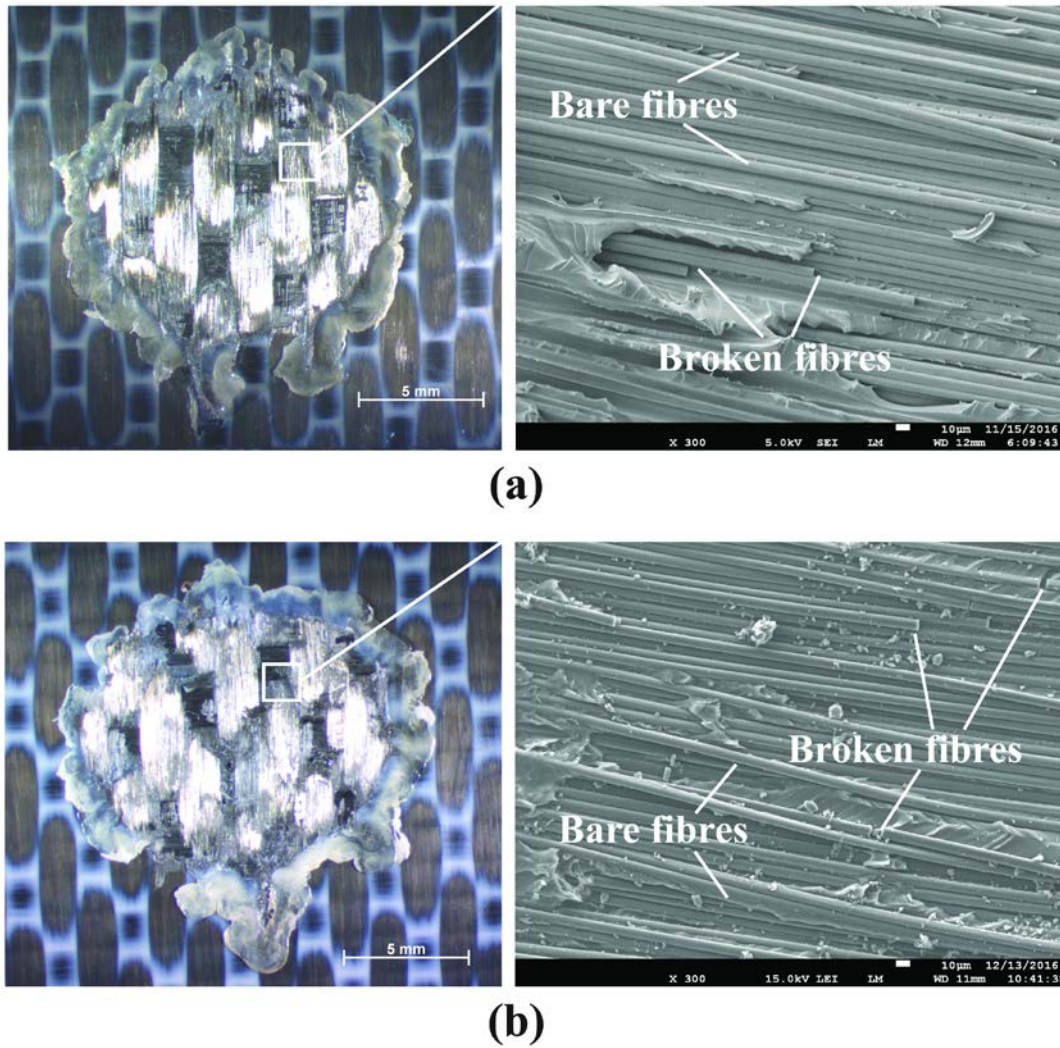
Representative fracture surfaces (left) and SEM detail (right) of SSW joints welded at (a) the optimum displacement (displacement-controlled welding) and (b) the optimum energy (energy-controlled welding). The scale bars are 5 mm (for stereo-microscopy) and 10 µm (for SEM). Both samples were welded in Jig 2. (For interpretation of the references to colour in this figure legend, the reader is referred to the web version of this article.)
